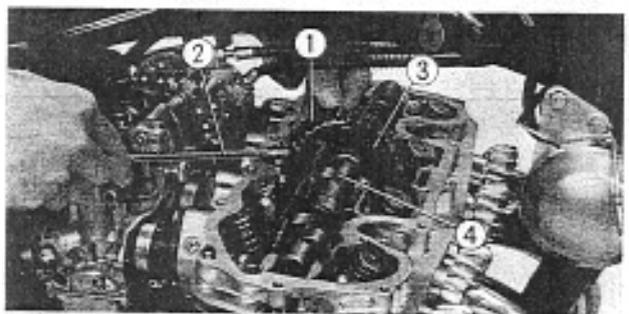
① Cam chain ③ Cam sprocket
